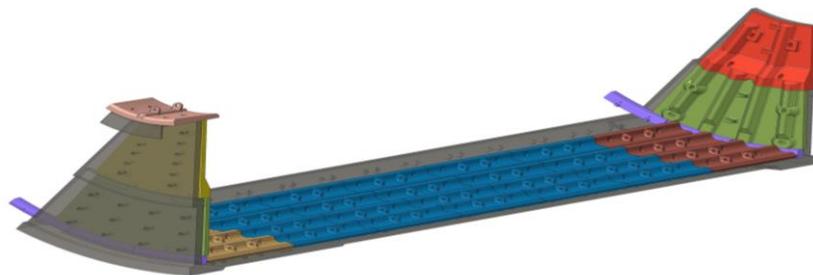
3D view of tube mill internals. Colors refer to different castings.
